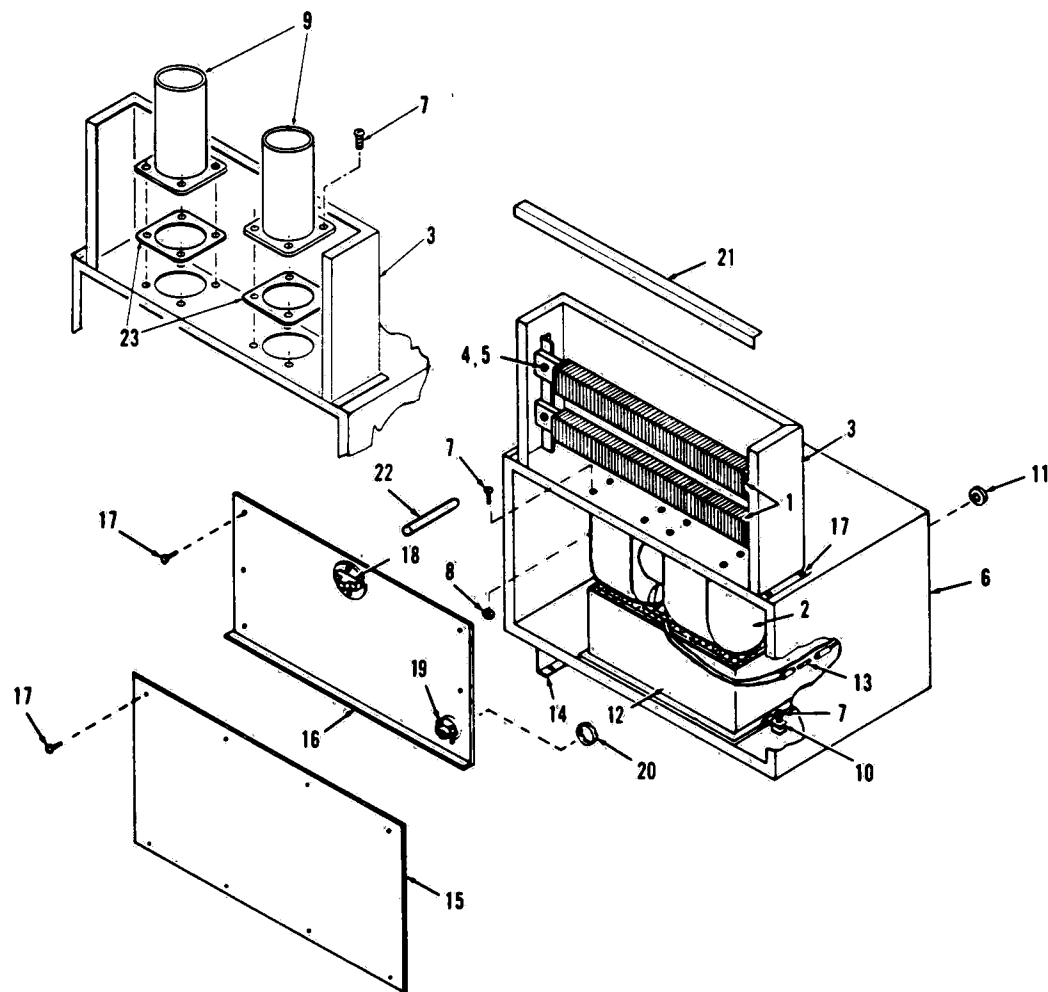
A. HEATER, FAN AND FILTER ASSEMBLY, Small Aerator
